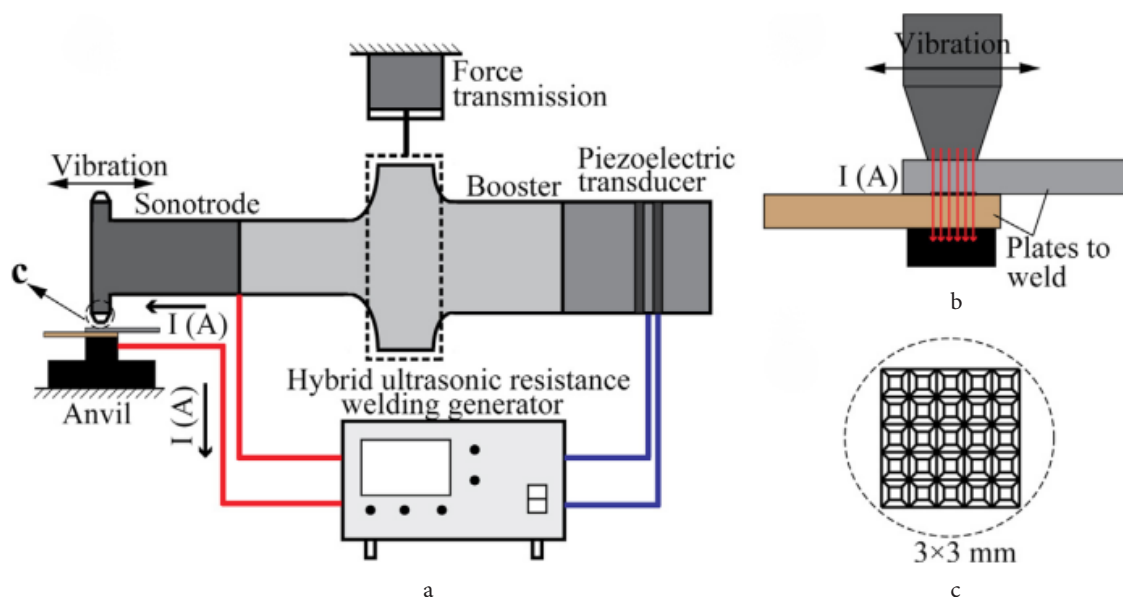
(Color online) Diagrammatic drawing of the electric Joule effect assisted ultrasonic welding system (a), details of welding location (b) and patterns on the knurled sonotrode tip (c) [56].
